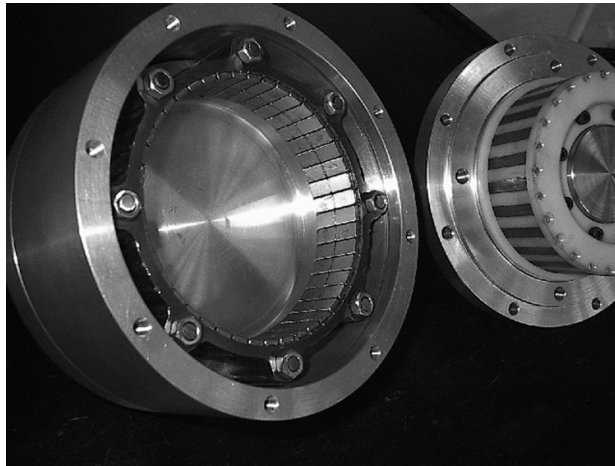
Prototype magnetic gear of Rasmussen *et al.* (ref. [14])
